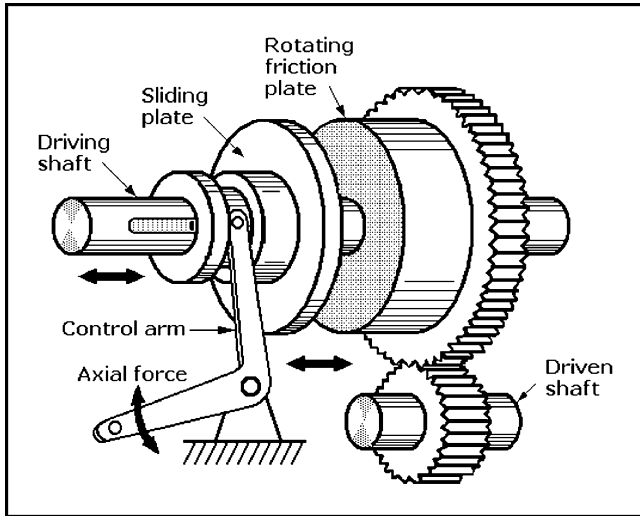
Friction plate clutch: When the left sliding plate on the driving shaft is clamped by the control arm against the right friction plate idling on the driving shaft, friction transfers the power of the driving shaft to the friction plate. Gear teeth on the friction plate mesh with a gear mounted on the driven shaft to complete the transfer of power to the driven mechanism. Clutch torque depends on the axial force exerted by the control arm.
